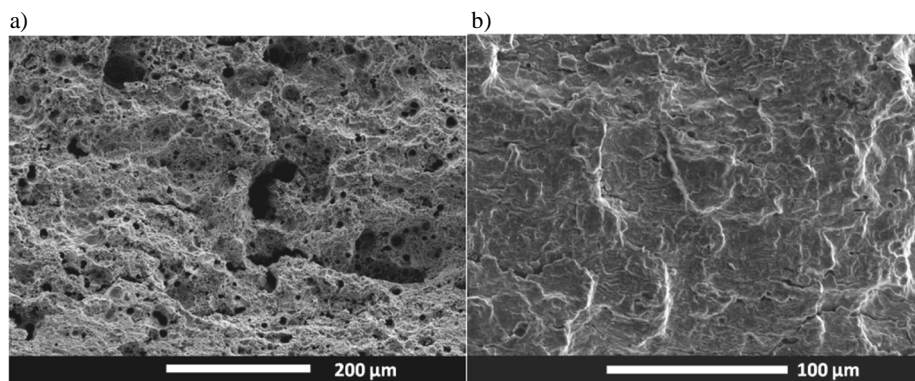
Fracture surfaces of bolts: a) ductile of bolt 1, b) brittle of bolt 3
